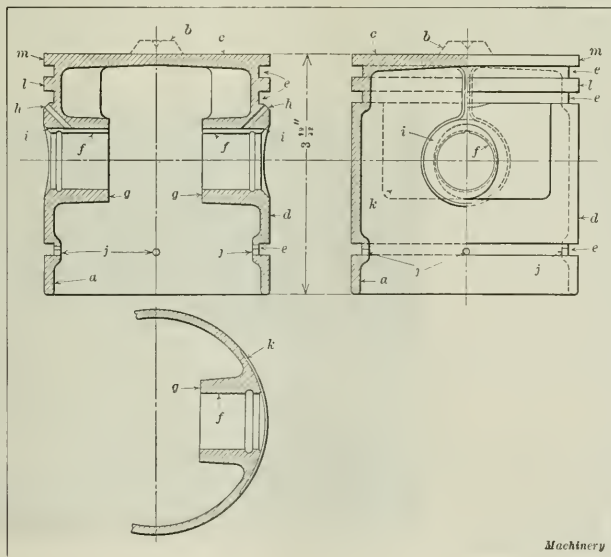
Piston on which Machining Operations listed in Accompanying Tables are performed
